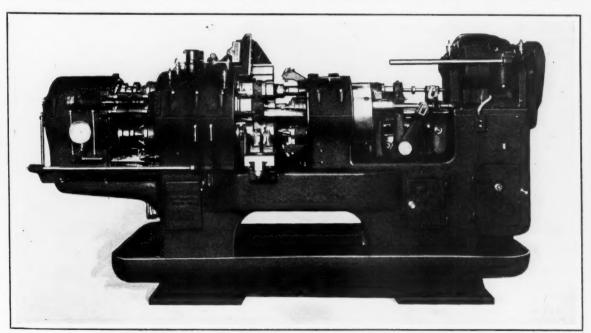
Cleveland Automatic with Hydraulically Operated Chucks
